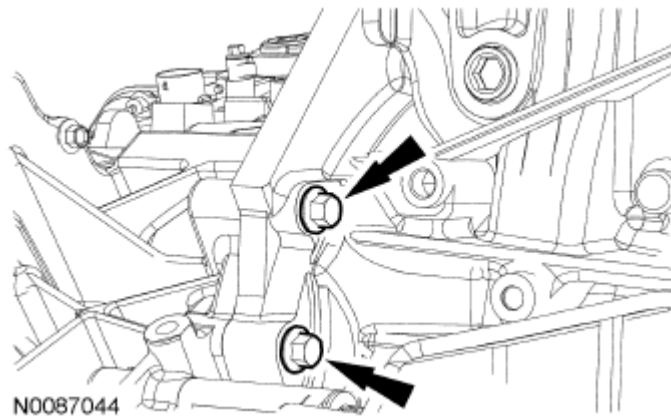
Locating RH Engine-To-Bellhousing Bolts
